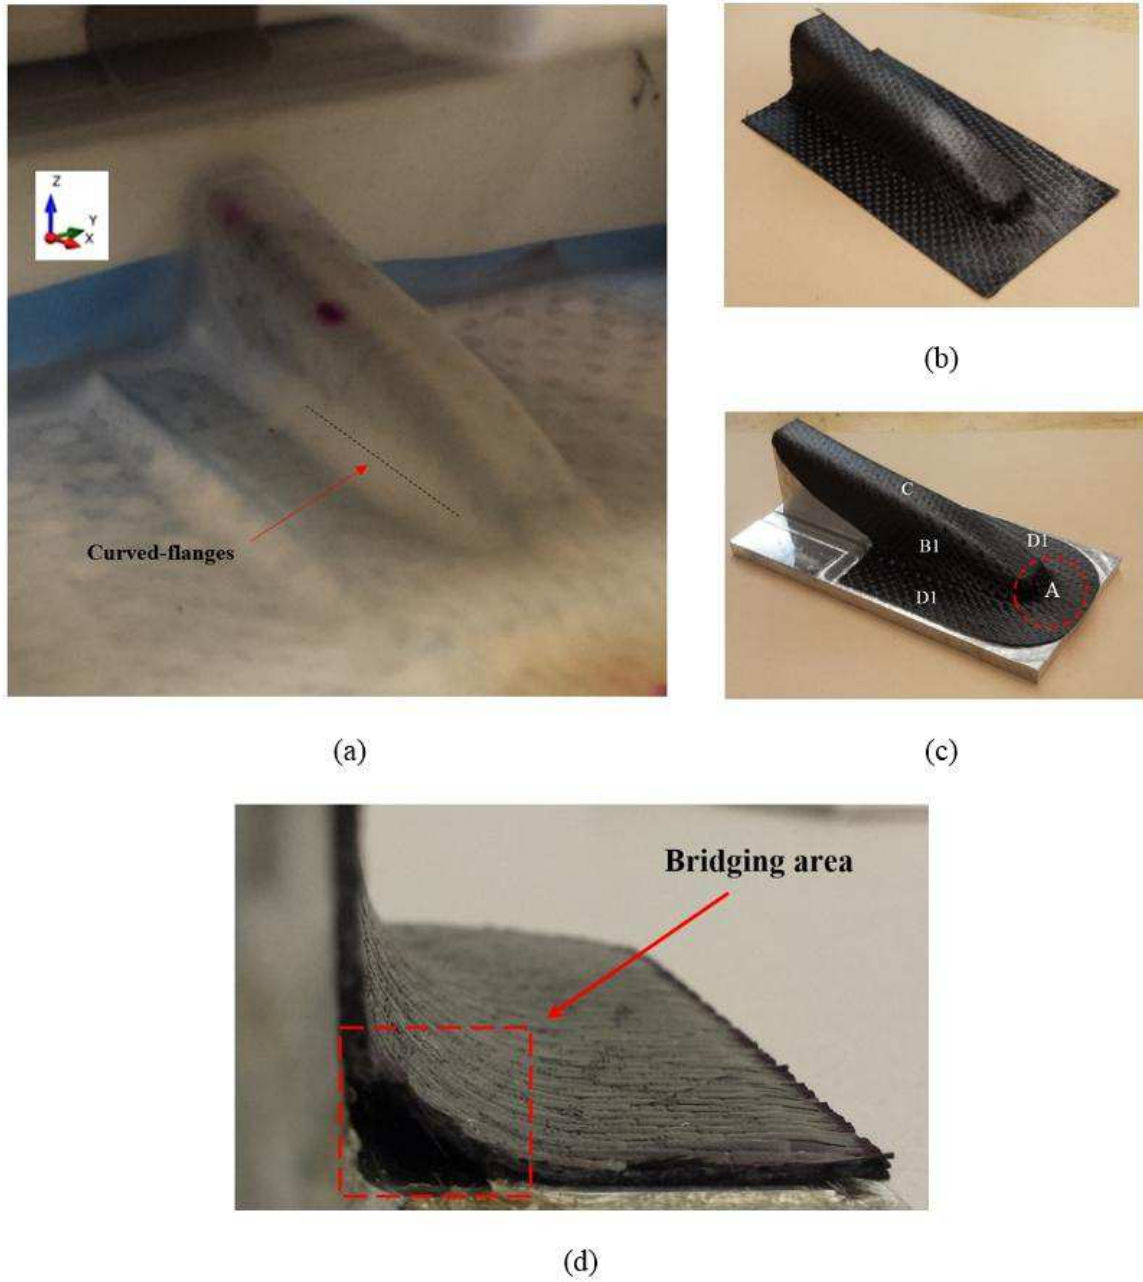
(a) Formed part during DDF process, (b) pre-trimmed part, (c) final part, and (d) bridging defect zones.
